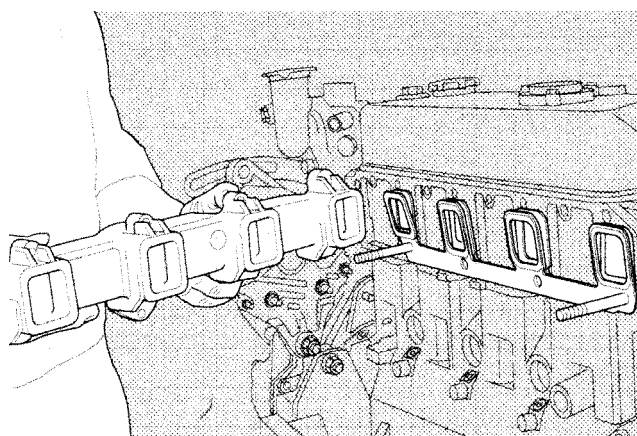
EXHAUST MANIFOLD AND GASKET
